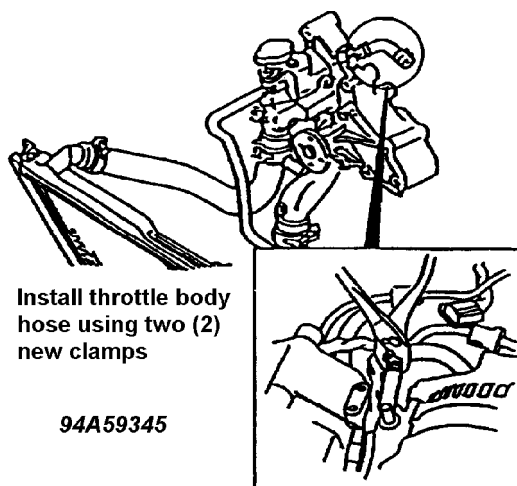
Installing Throttle Body Hose (N3A1-13-692A)
